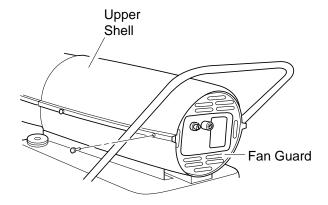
Upper Shell Removal, 150,000 BTU/Hr Model
